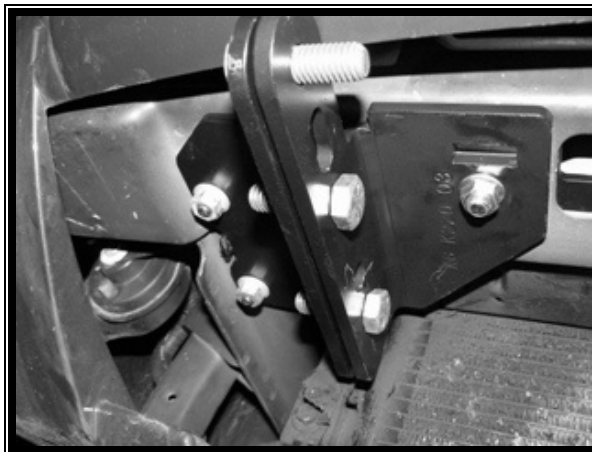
Passenger side view showing location of outside and inside mounting brackets.
